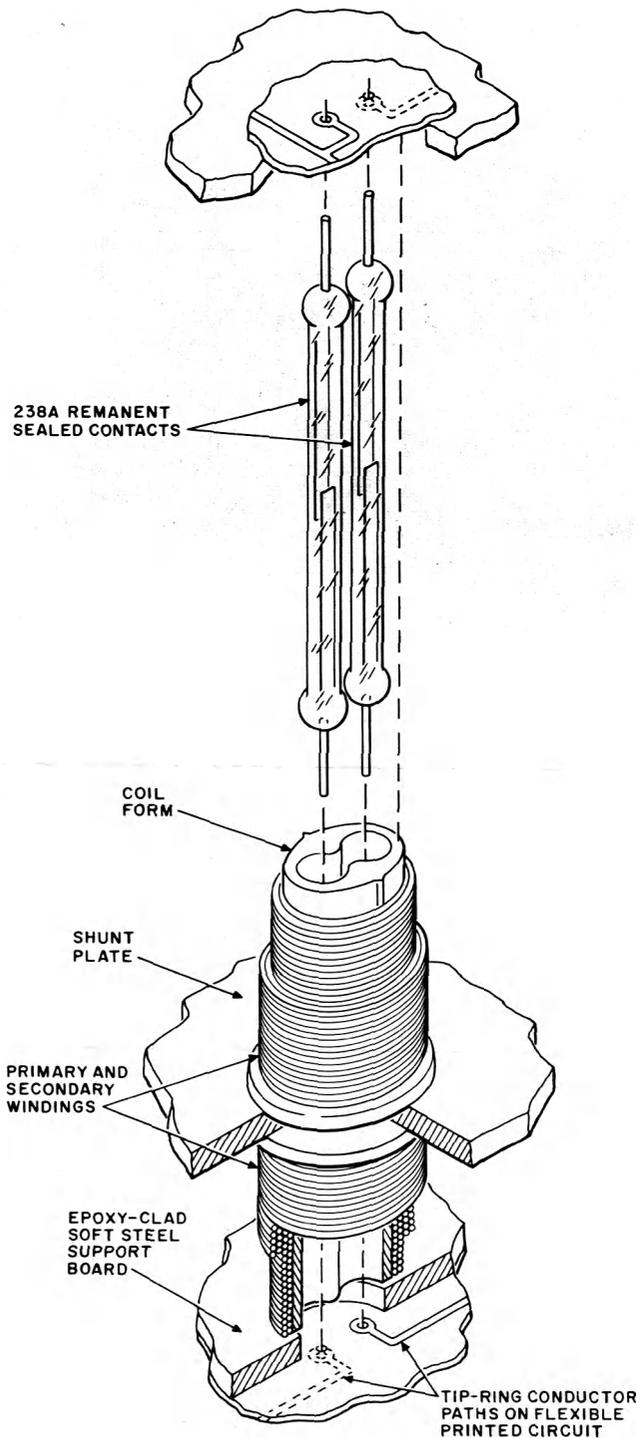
Remreed Crosspoint Switch (Exploded View)
